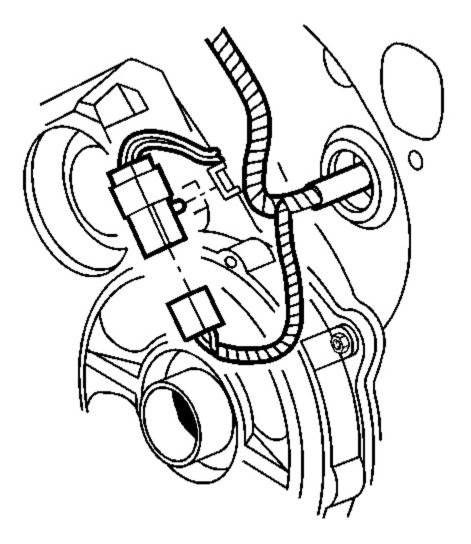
Electrical/Audio Connector At Front Door Radio Speaker Courtesy of GENERAL MOTORS CORP. 2. Disconnect the electrical/audio connector from the front door radio speaker assembly.
